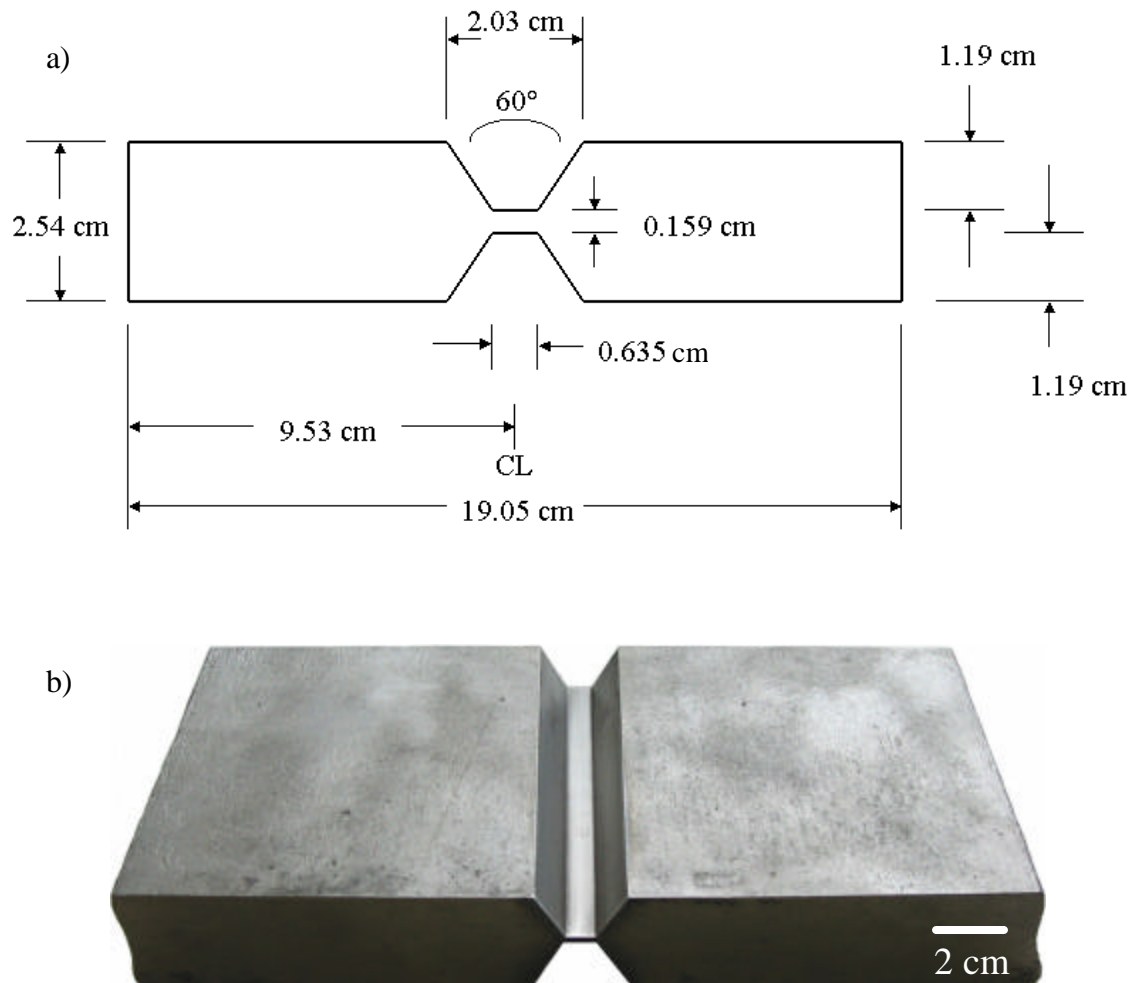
Double-V grooves machined into all weld plates, (a) schematic drawing and (b) actual plates after machining and polishing.
